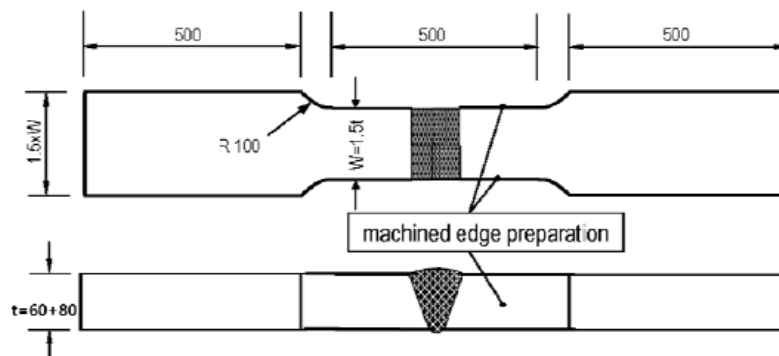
Butt weld specimens (thickness range 60 and 80mm)
